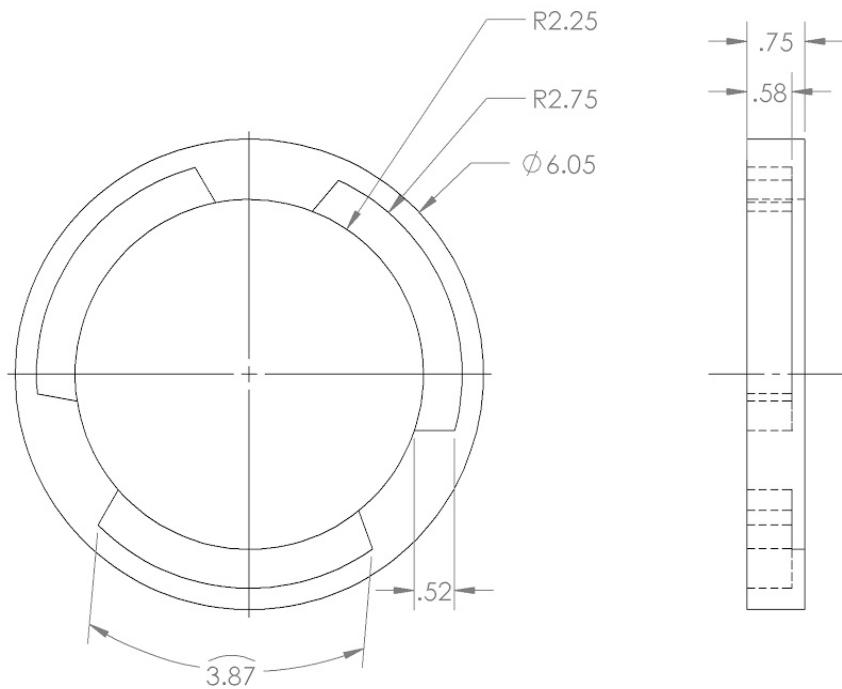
Locking Mechanism Bottom Outer Ring Drawing
